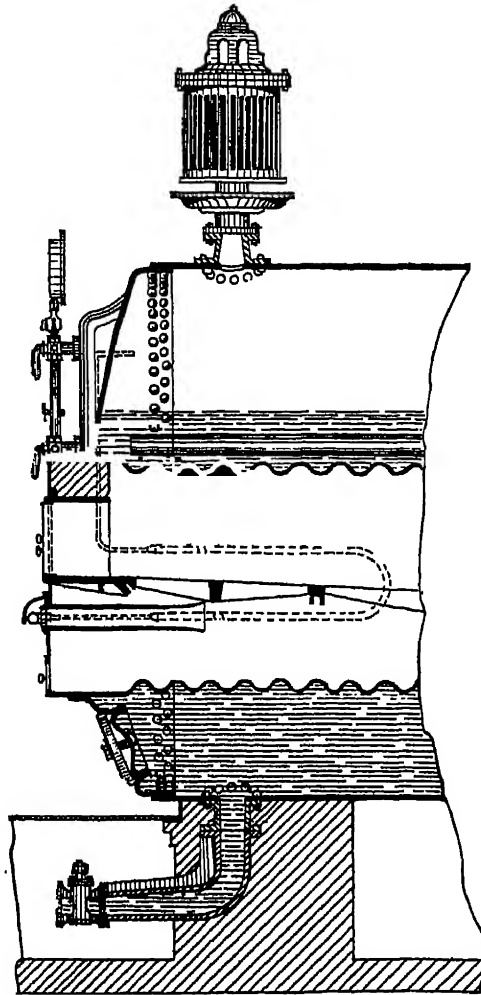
End Section of Dish-ended Boiler with Forced-draught Furnace
